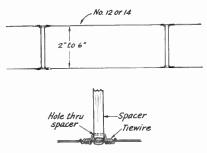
Typical construction of open-wire line. The line conductor fits in a groove in the end of the spacer, and is held in place by a tie-wire anchored in a hole near the groove.
